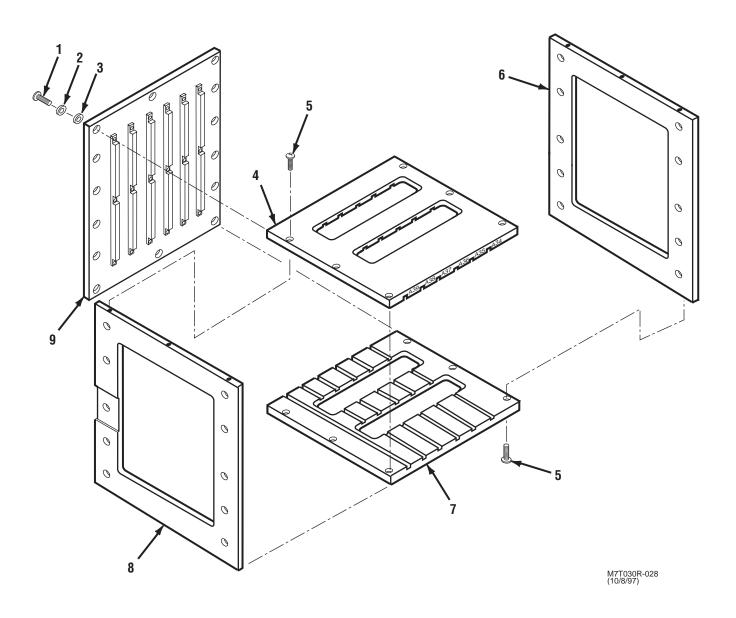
Group 01A010129 OIU Mini Card Cage Assembly 12309779-1
